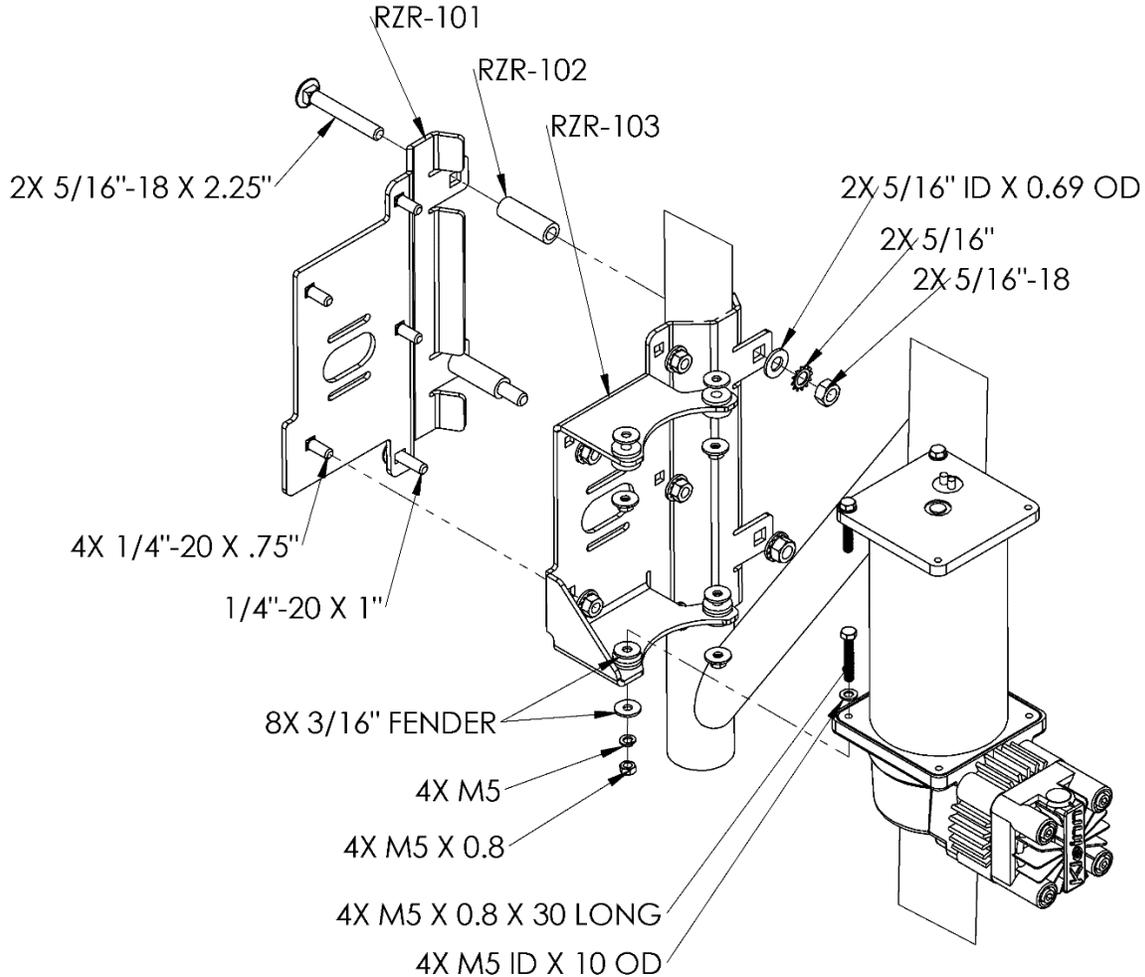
Air Compressor Assembly & Hardware Exploded View
